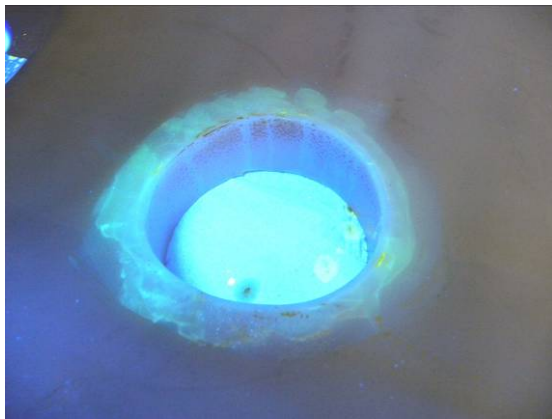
PVC-lined FRP pipe after exposure to spent acid. A corroded layer has formed as well as surface cracks, deeper cracks and damage in the weld.
